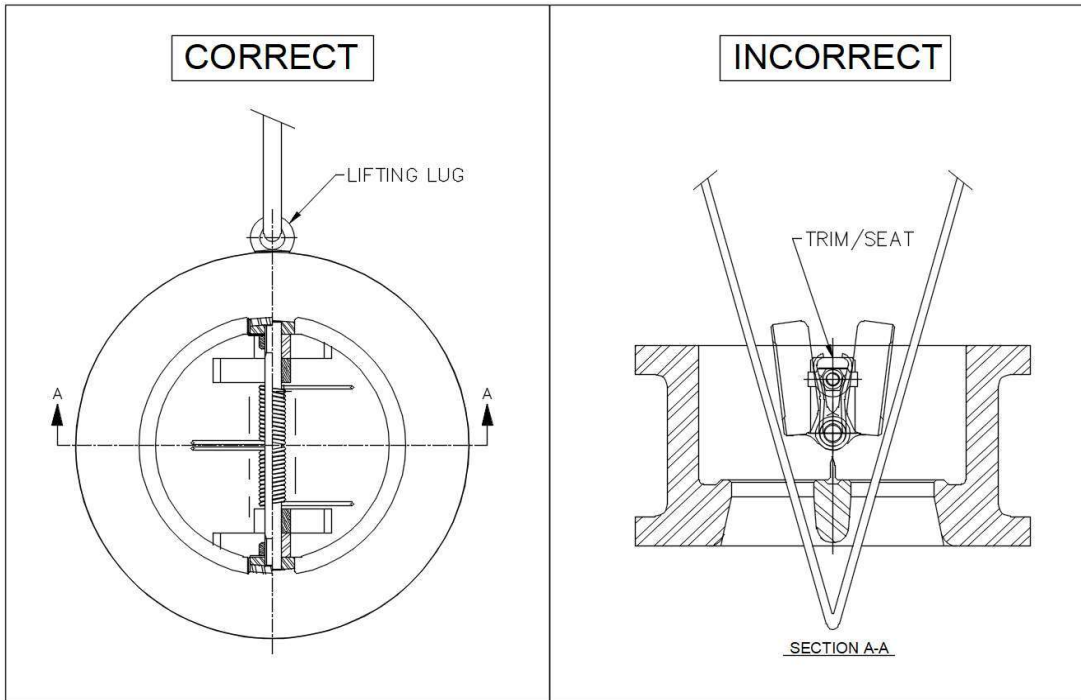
C&C DPWC Series dual plate wafer check valve proper lifting with lifting lug
